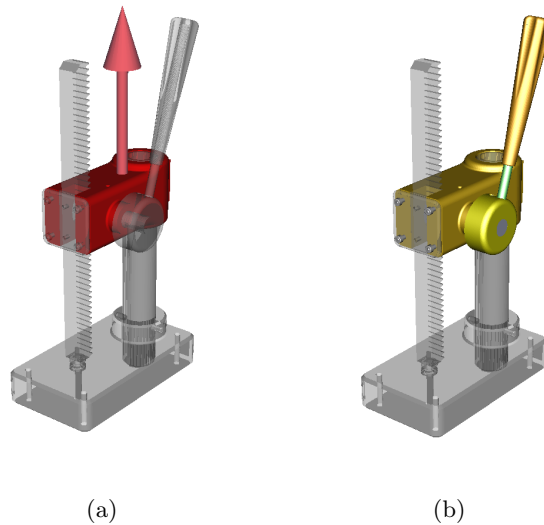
(a) The disassembly problem considered in this example. The part marked in red defines a basic structural component whose removal involves most parts in the assembly. (b) The partitions involved in the disassembly process are rendered as opaque objects, while the remainders are shown with transparency.
